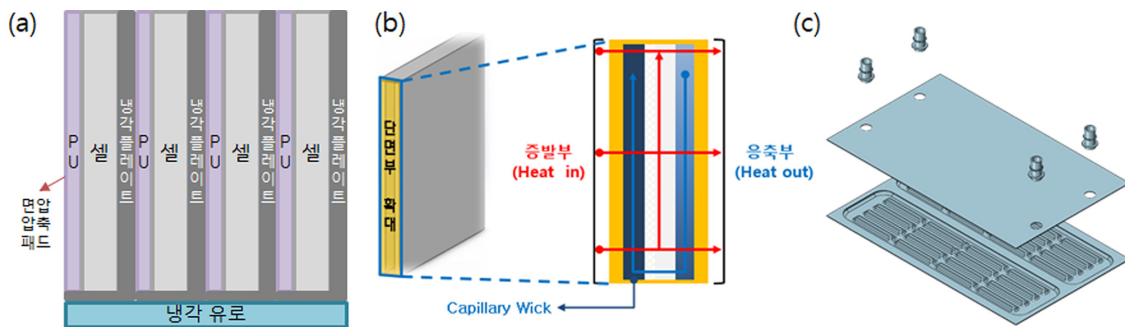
The schematic of vapor chamber: (a) structure, (b) detailed cross-sectional diagram and (c) exploded view.
